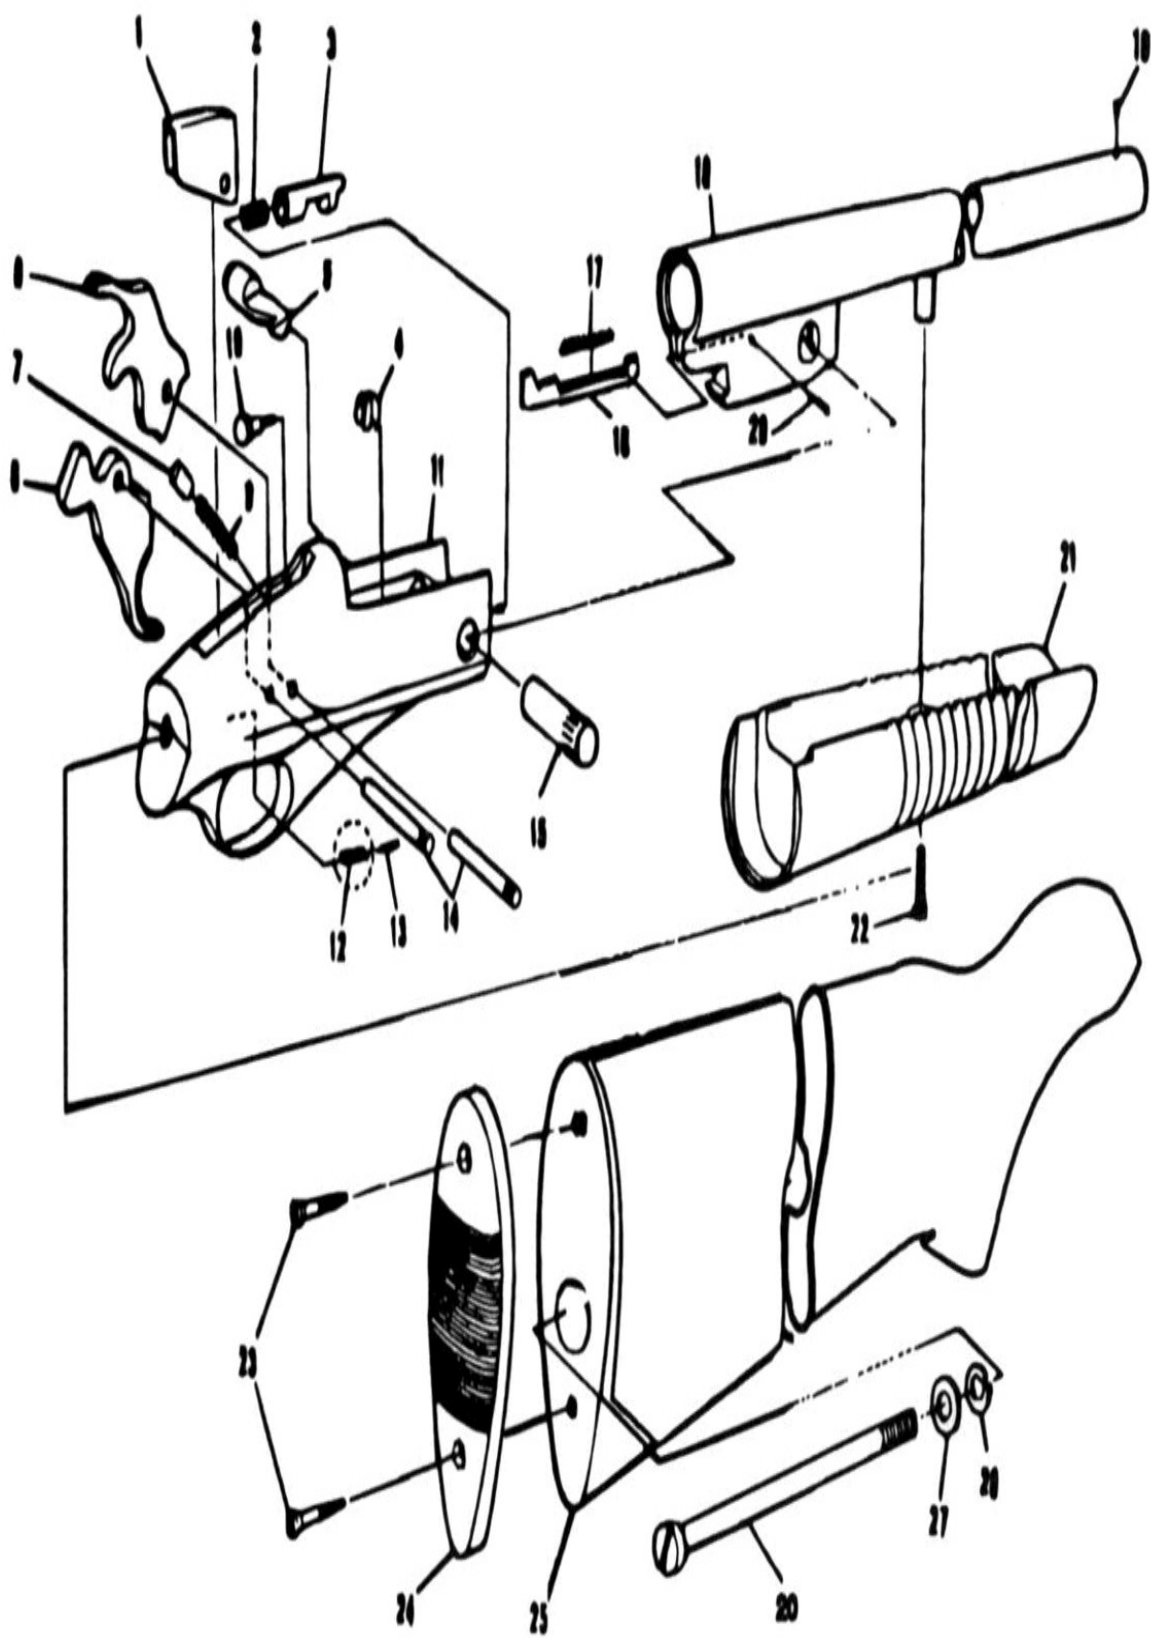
Exploded views of firearms can be extremely helpful during the disassembly/assembly process.
